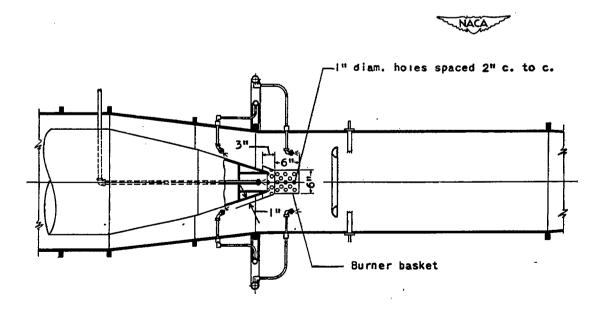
Sketch of burner 10 snowing perforated basket for inner cone.
